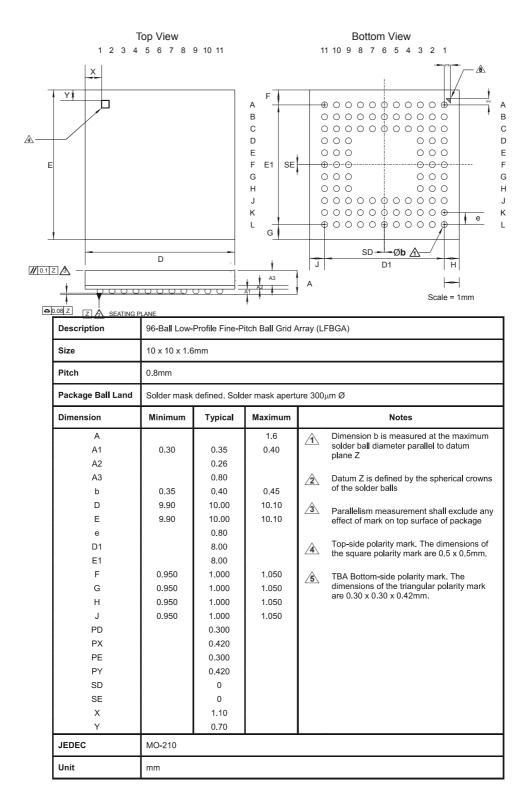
BlueCore4-ROM Plug-n-Go 96-Ball LFBGA 1.6mm Package Dimensions
